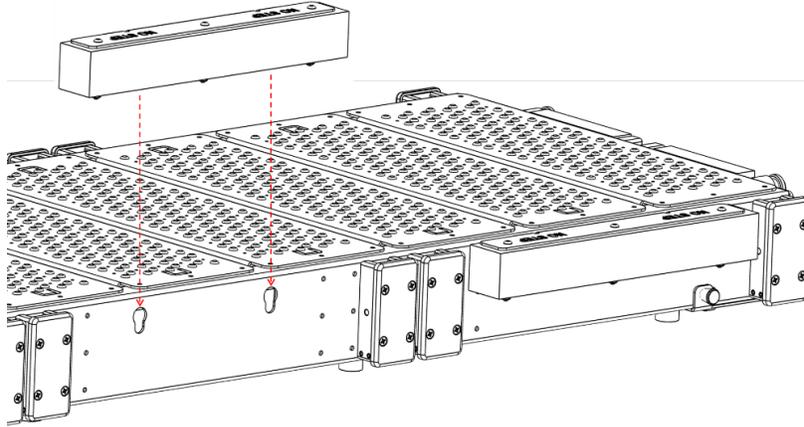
Align and drop Single Step into guardrail receivers (guardrails not shown).
